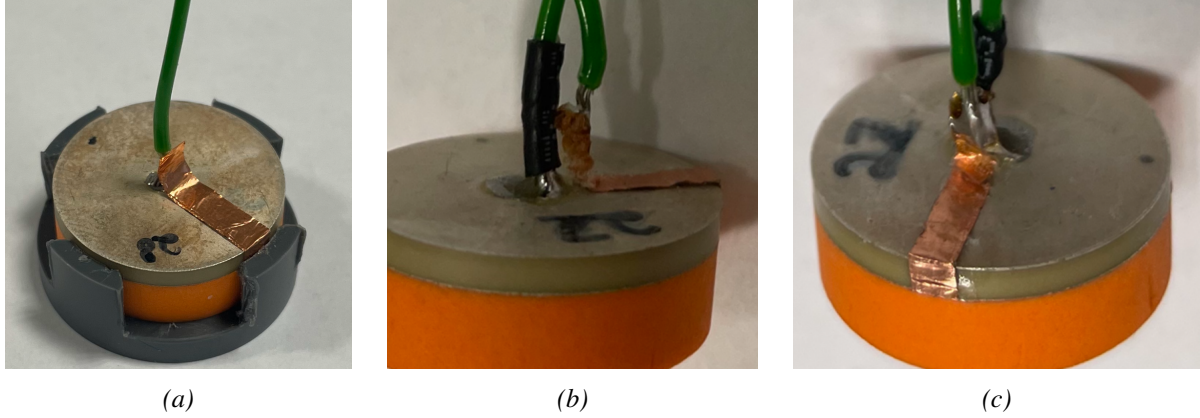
(a) Copper strip after cutting of excess length (b) Black shrink tube used to insulate the wire which is soldered to the electrode facing the backing layer (c) The copper strip after attachment of a wire using solder.
